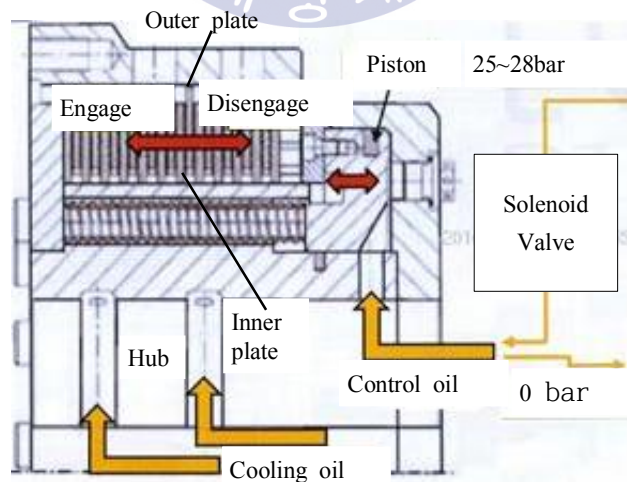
Section and oil supply paths of clutch¹⁾
